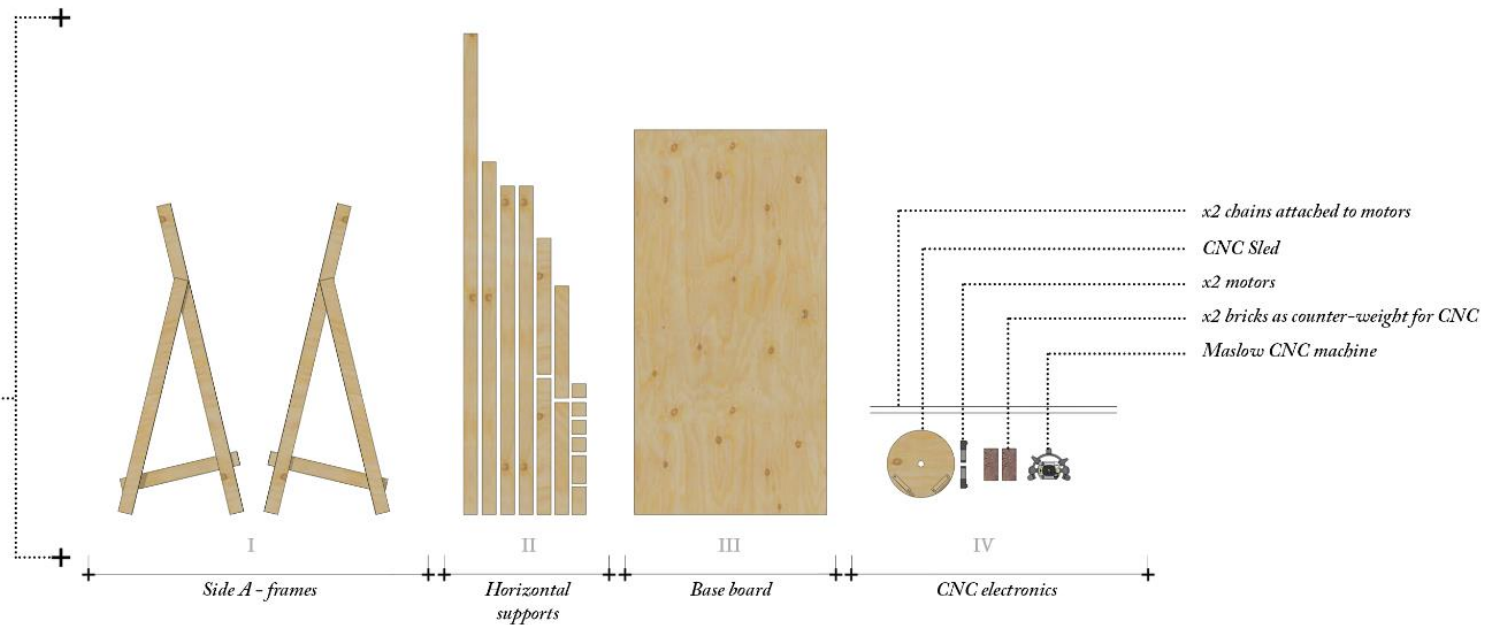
CNC Machine by Maslow. Components + Assembly Guide. (Source: By Author)
